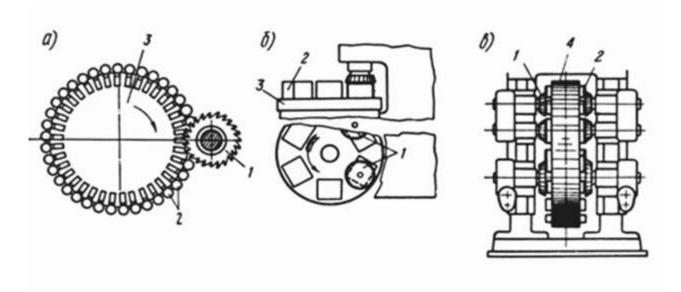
Placement of billets for processing on round-the-clock and drummilling machines: a-round-rolled milling machine with one spindle; b-rotary-milling machine with two spindles; in-drum and milling machine; 1-cutters; 2-workpieces; 3-table; 4-drum
